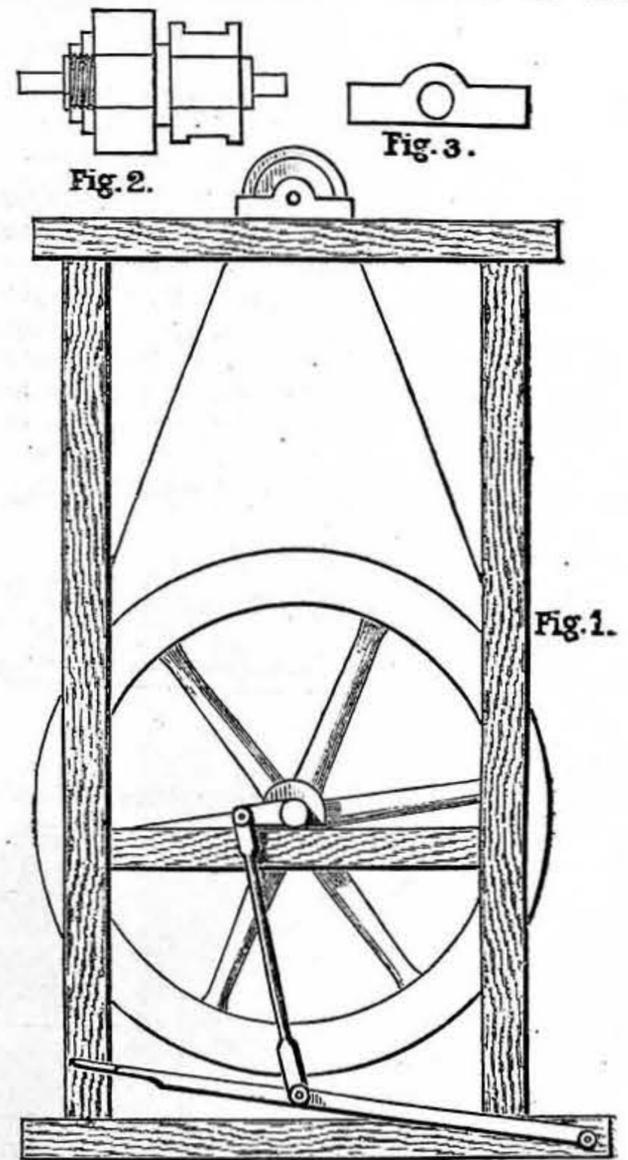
Side Elevation of Grindstone. Fig. 2.—Axle of Grindstone. Fig. 3.—Bearing.
